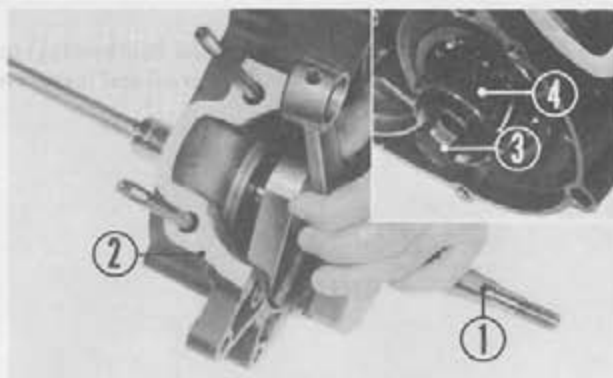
① Crankshaft ④ Primary drive gear
